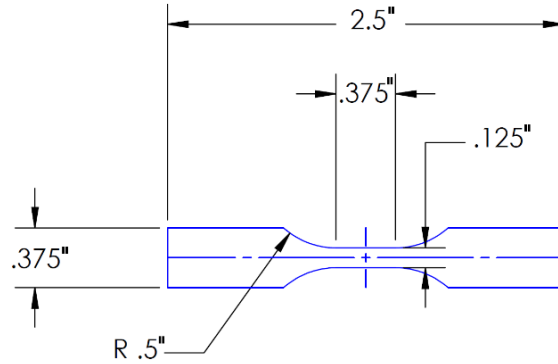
Dimensions of the dog-bone shape samples used for the tensile tests
